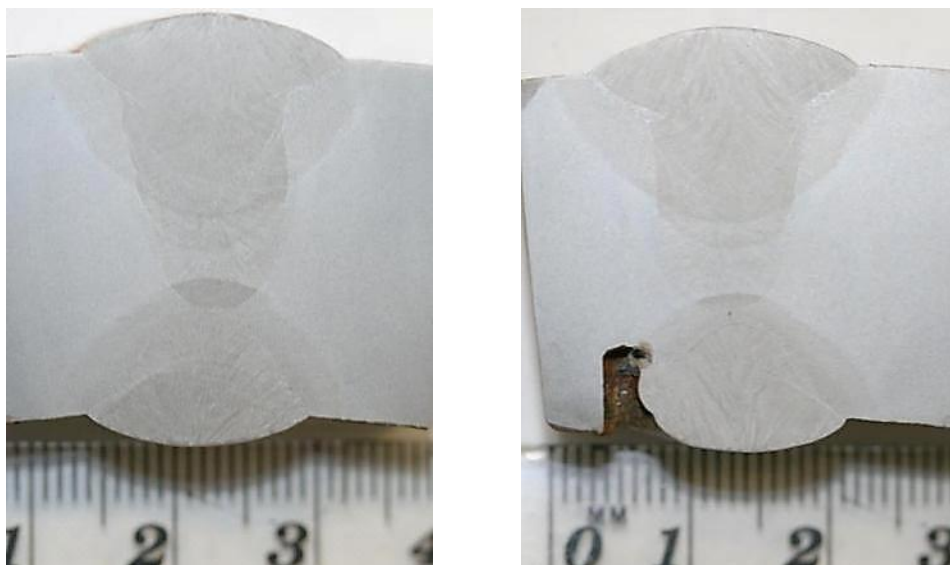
Macrographs of X65 (A) weld 1
